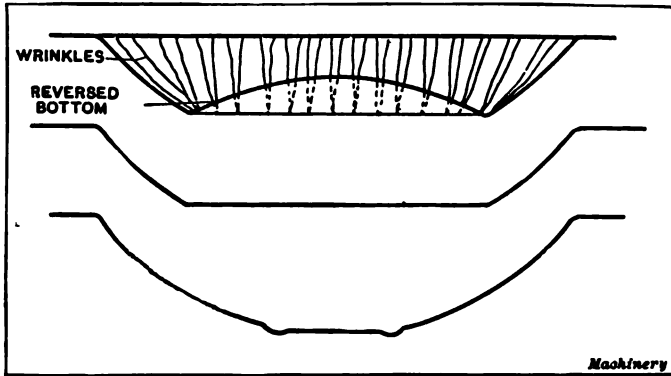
Top View: Cover produced by Old Method of Drawing in One Operation, causing Wrinkles, even with Reversed Bottom. Middle View: First Stage in Drawing Cover in One Operation. Lower View: Finished Cover
